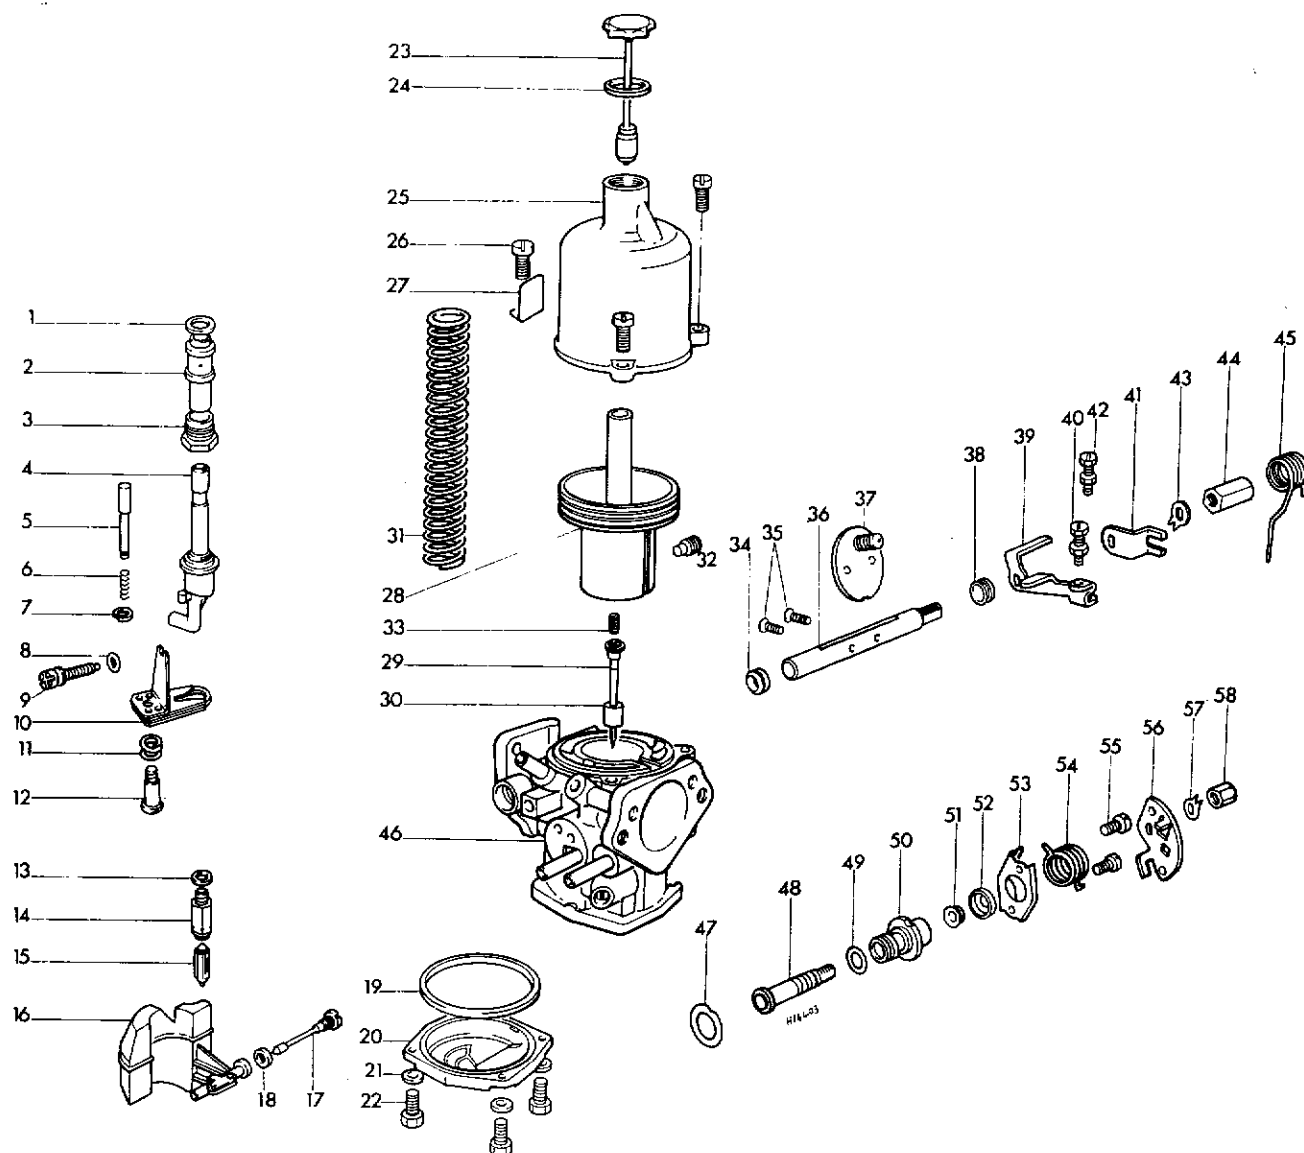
Exploded view of manual choke HIF carburettor for twin carburettor installation (Sec 9)
